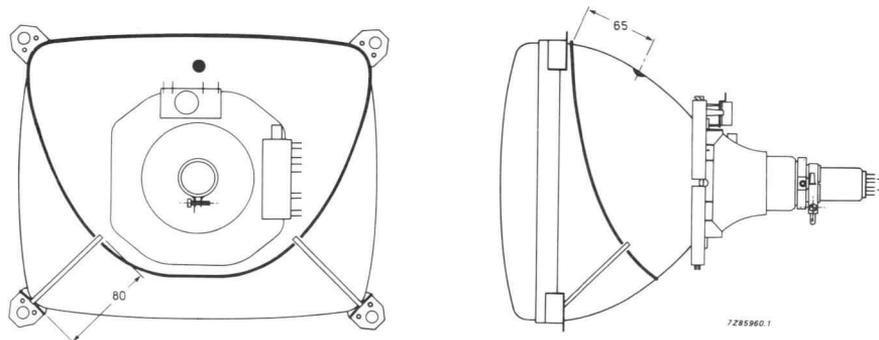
Position of degaussing coil on the display tube; dimensions are given in mm.
